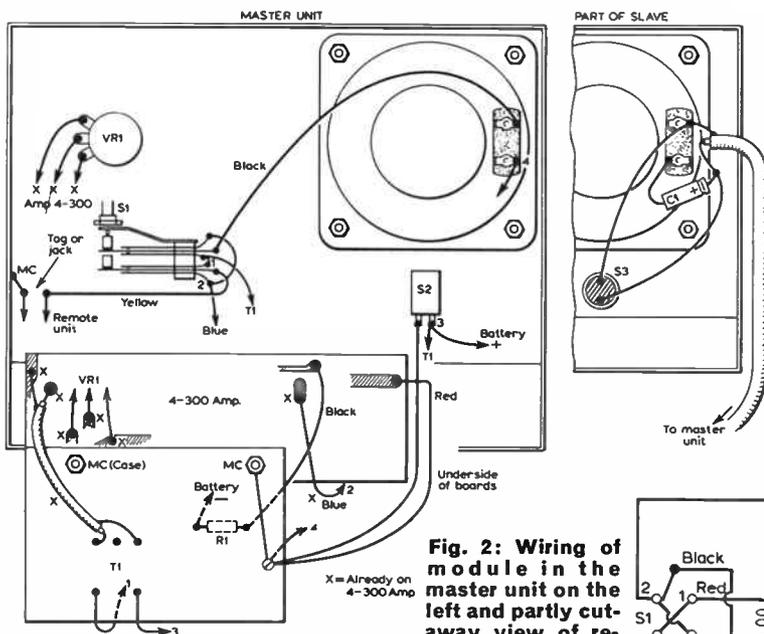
Wiring of module in the master unit on the left and partly cut-away view of remote unit
